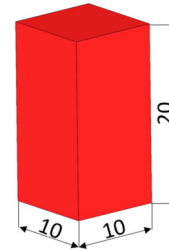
Specimen for compressive testing in Solidworks 2022.
